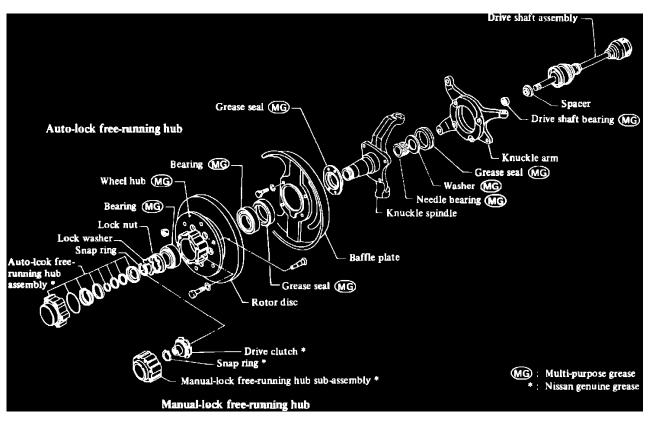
Front axle exploded view. 1985-86 4WD Pickup
